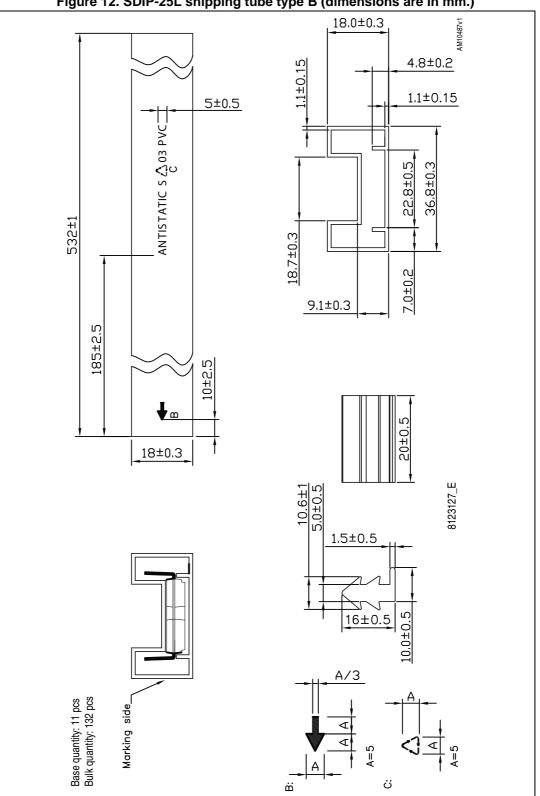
SDIP-25L shipping tube type B (dimensions are in mm.)
